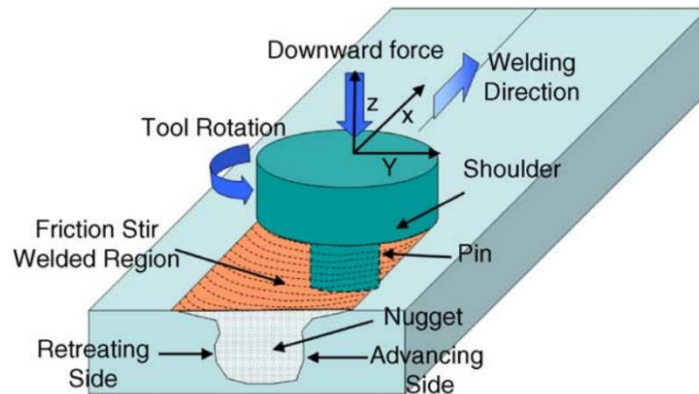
Schematic drawing of friction stir welding[4].
